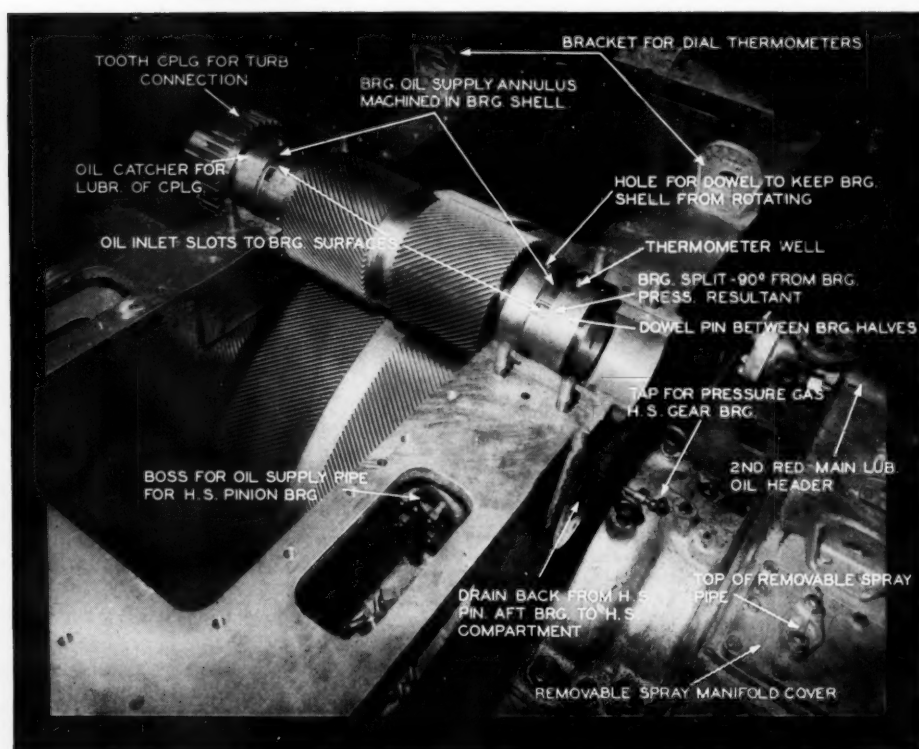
Views of a large marine reduction gear set with covers removed to show the header system of lubrication, the bearings and fine tooth type flexible coupling.
